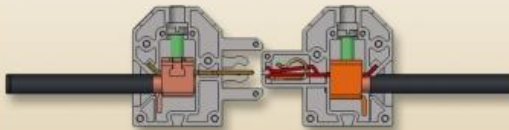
Sectional View of Plug and Socket Terminal PS 8M
